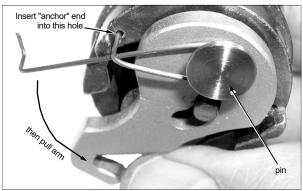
Insert pin and spring; pull arm and clip on hook cam lever.
